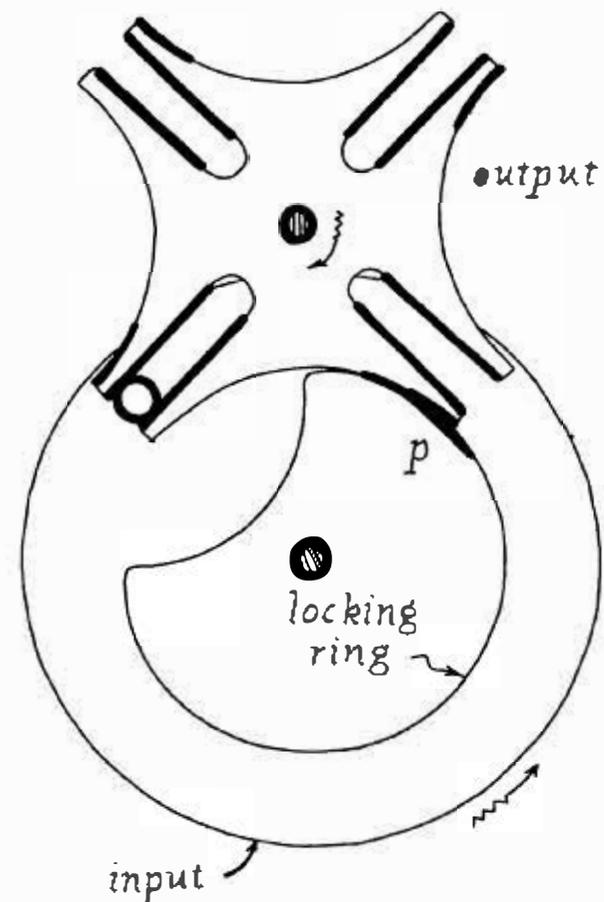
Heavy black lines indicate the typical wear points in a Geneva mechanism.
